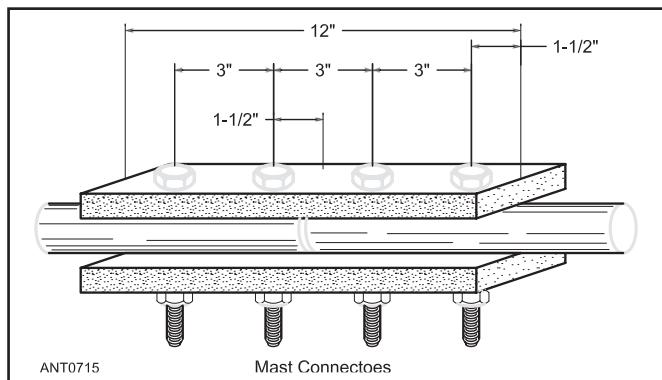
Mast coupling connector details for the portable quad. The plates should be drilled two at a time to ensure the holes line up.
